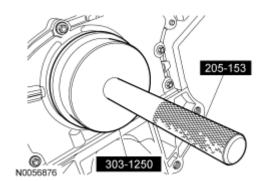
Positioning Special Tool (303-1250) Onto End Of Crankshaft Courtesy of FORD MOTOR CO.
